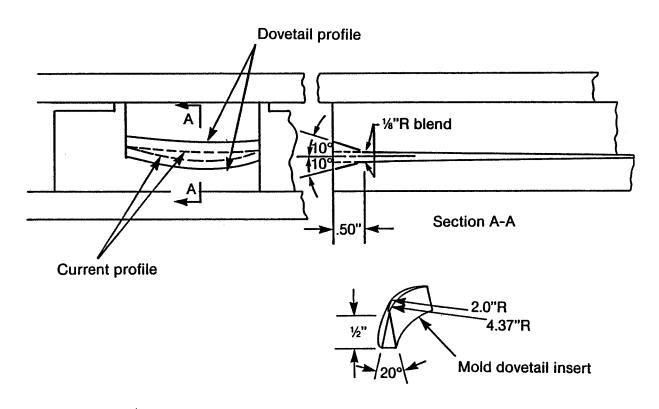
Vane Mold Tool with Dovetail and Dovetail Insert.
